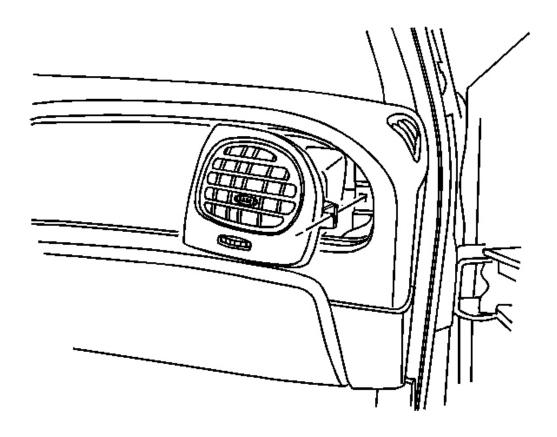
Removing/Installing Outlet Assembly Courtesy of GENERAL MOTORS CORP.
